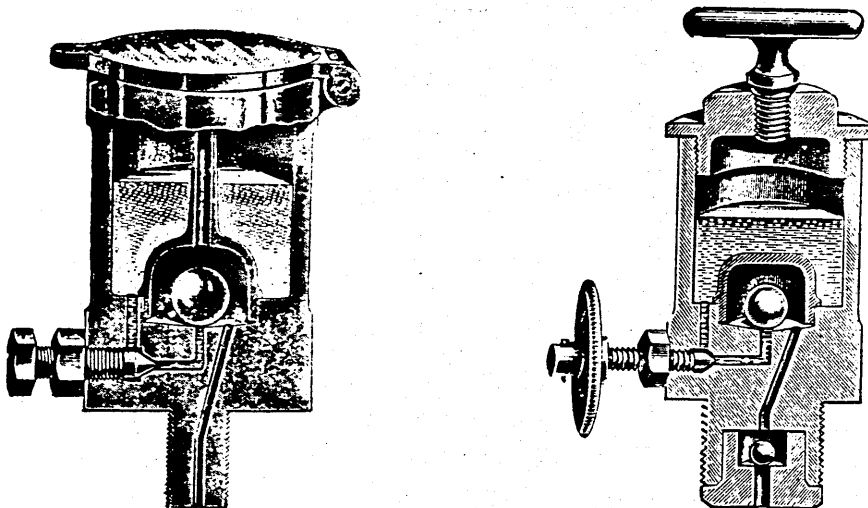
Two examples of "oscillating ball" lubricators.
